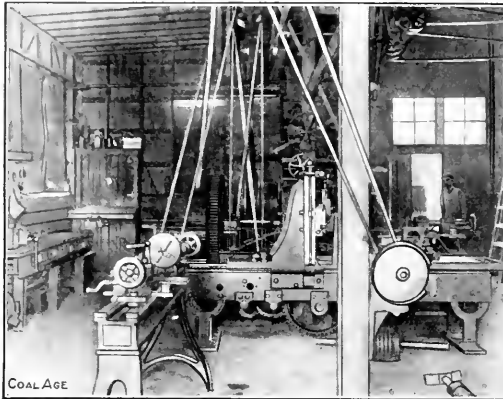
SHOWING INTERIOR OF MACHINE SHOP
